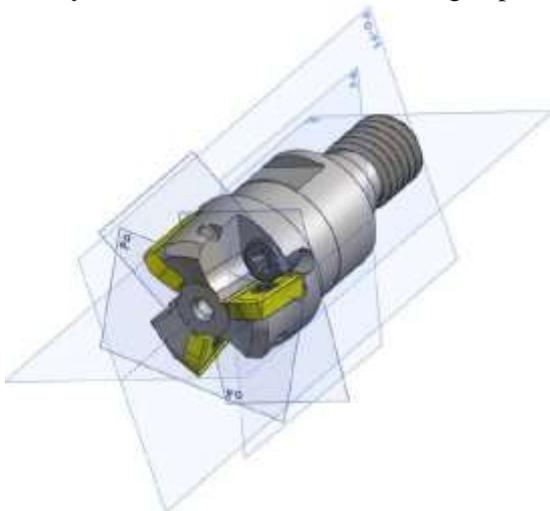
Non-monolithic milling tool with three carbide cutter insert
